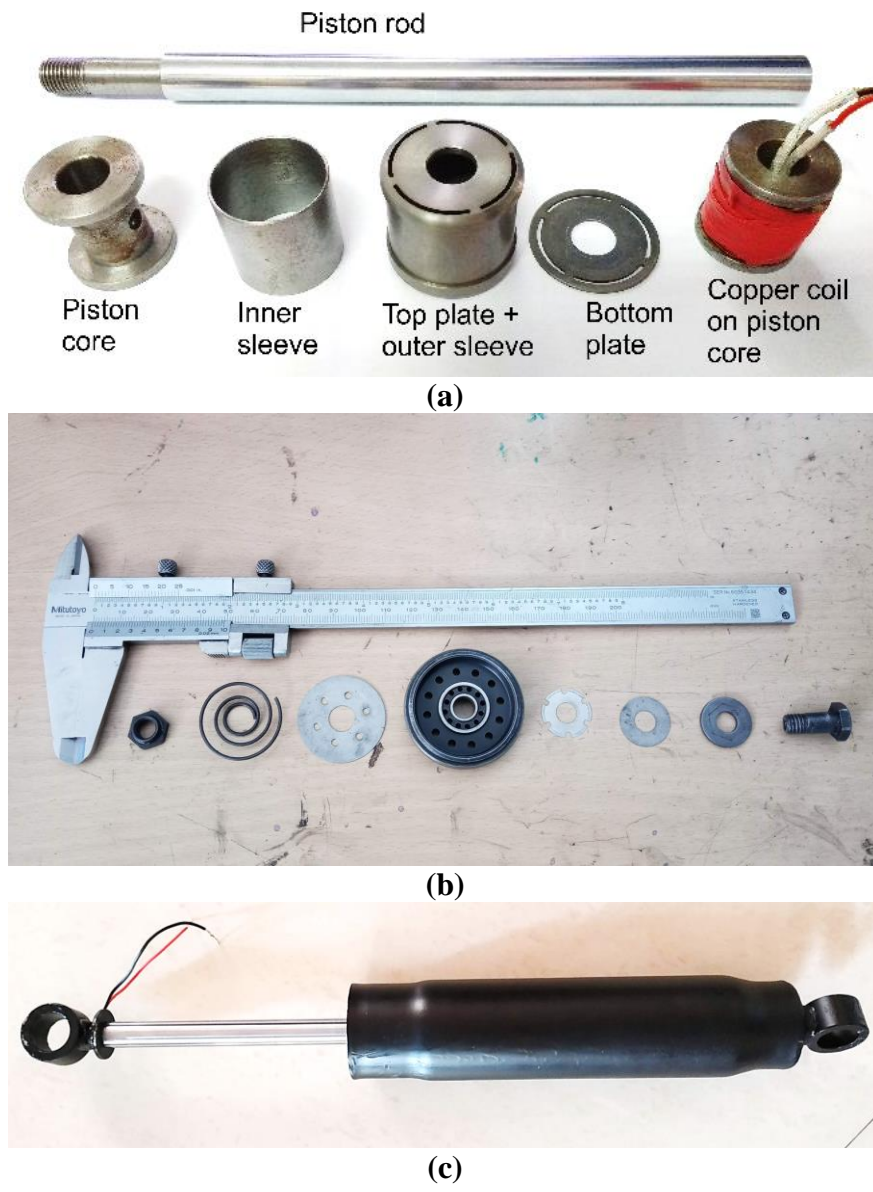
(a) MR damper piston assembly (b) Base valve of MR damper (c) Twin tube MR damper
